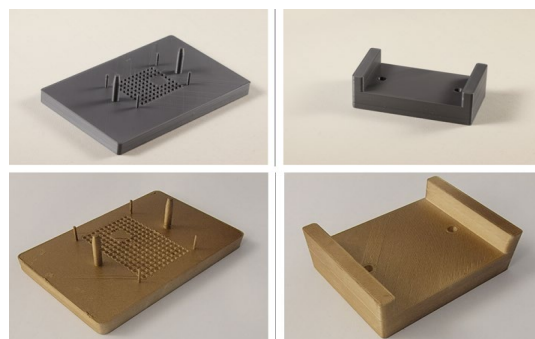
FM (top) and GM (bottom) Press-In Fixturing
